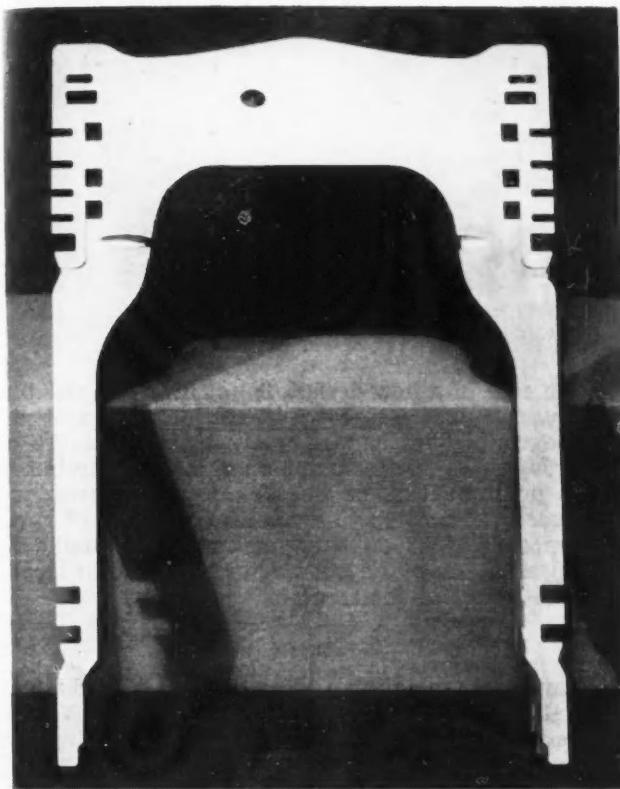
The shrunk on and welded ring carrier affords the means for cooling this diesel piston
